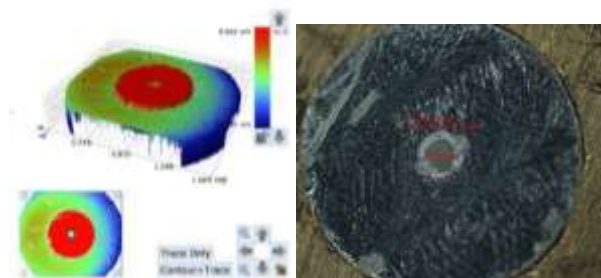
a) *Left* - White light interferometry scan showing the surface roughness and level with the Au washer assembled. b) *Right* - an optical image showing the diameter (and clear burring) of the central cavity of the Al part, after assembly of the Au washer.
